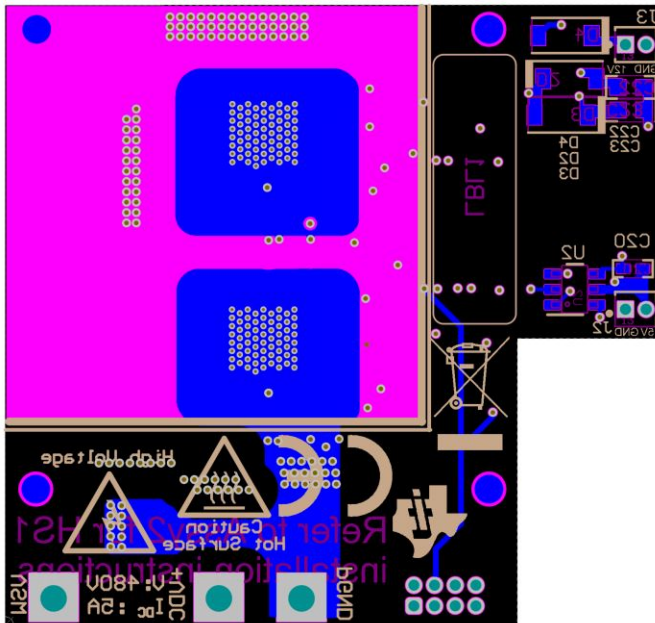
LMG3410EVM-031 Bottom Layer and Components
